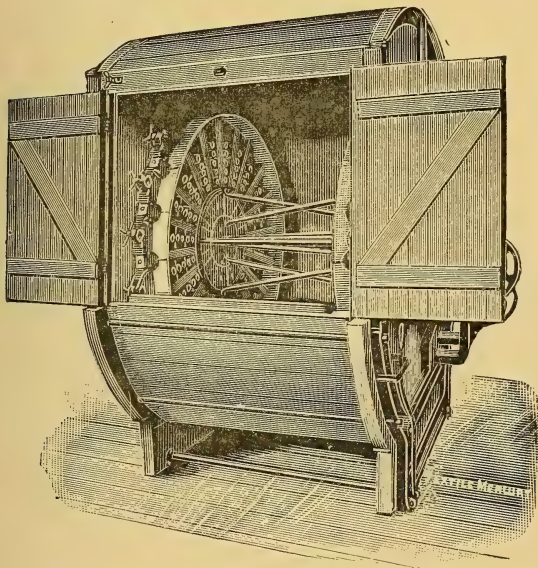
THE KLAUDER-WELDON DYEING MACHINE.
